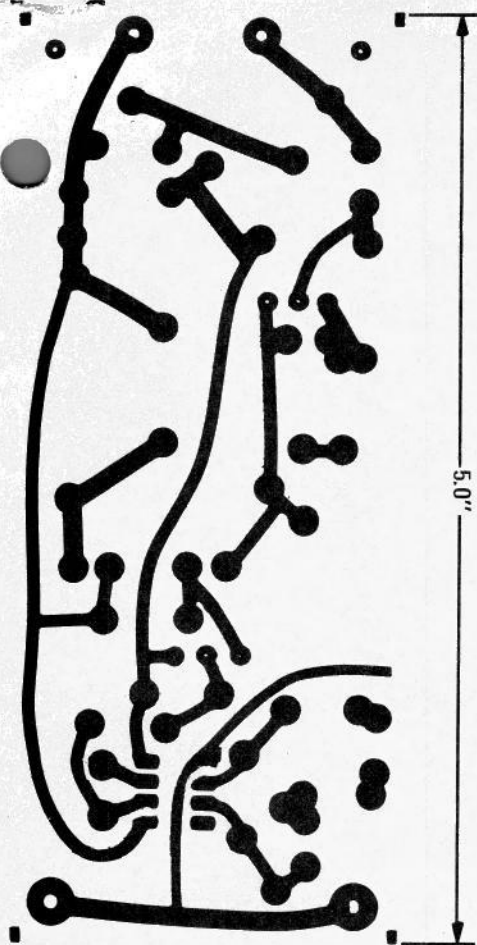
FOIL PATTERN of the ring detector PC board shown full size.
